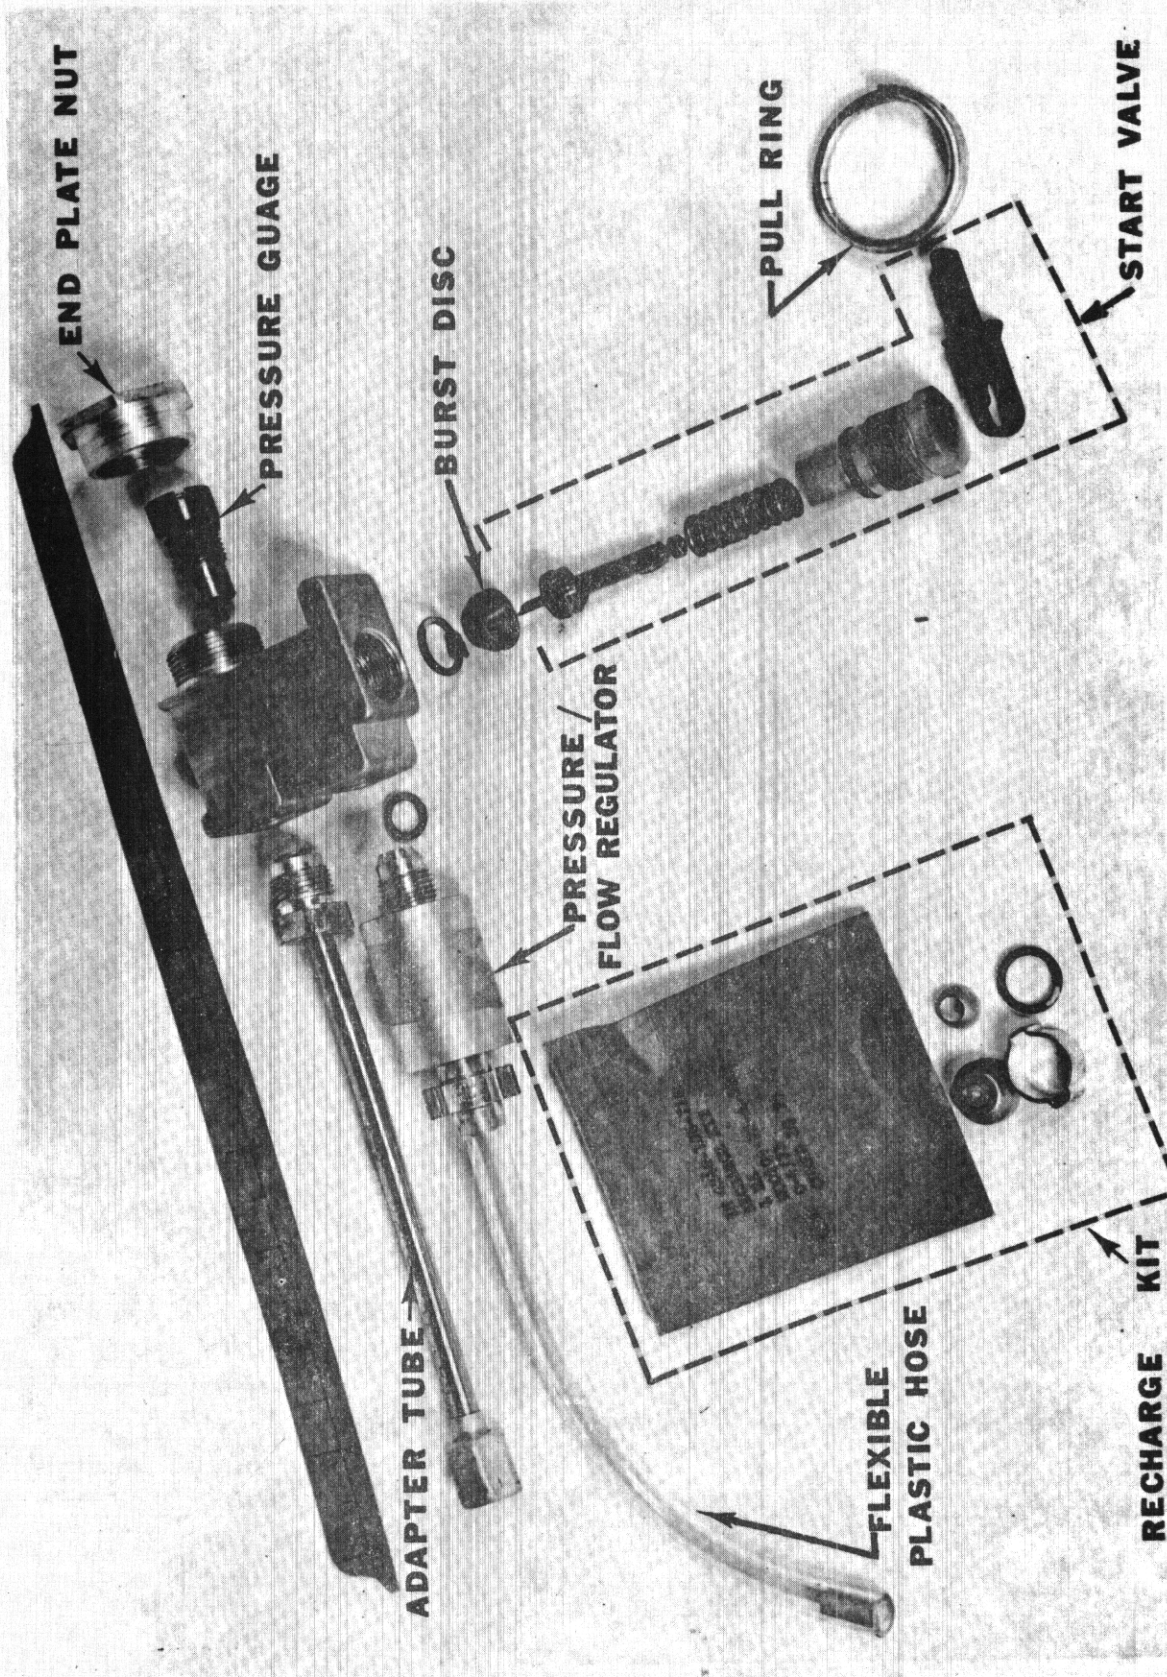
RECHARGE KIT AND START VALVE ASSEMBLY
